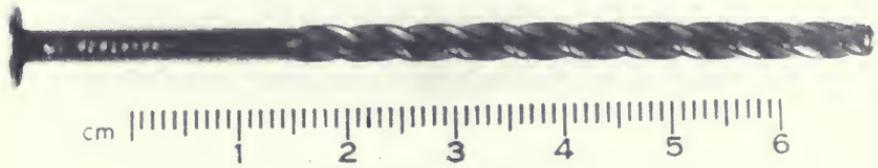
Three- by 0.120-inch pointless, helically-threaded, hardened-steel pallet nail with thin-rimmed umbrella head; the four flutes have a thread angle of 63 degrees.
